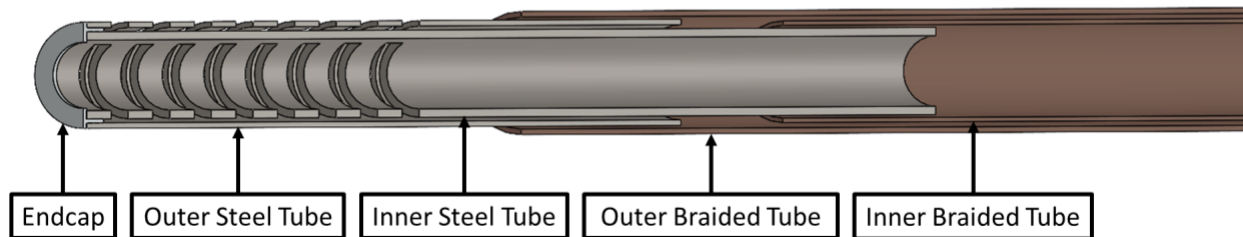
Cross-sectional view of camera CAAR and attached braided tubes.
